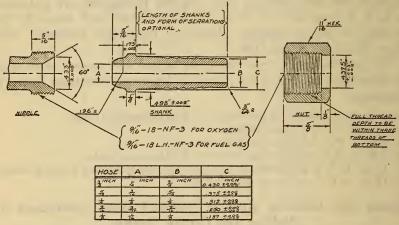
"B" size of standard hose connections for welding and cutting torches
